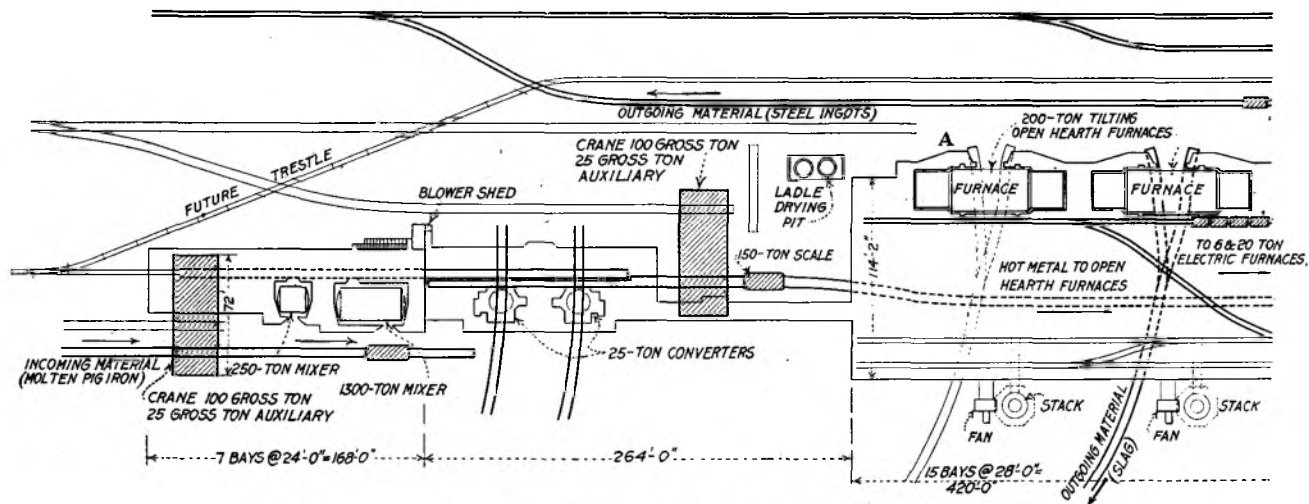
GENERAL PLAN OF DUPLEX PLANT
